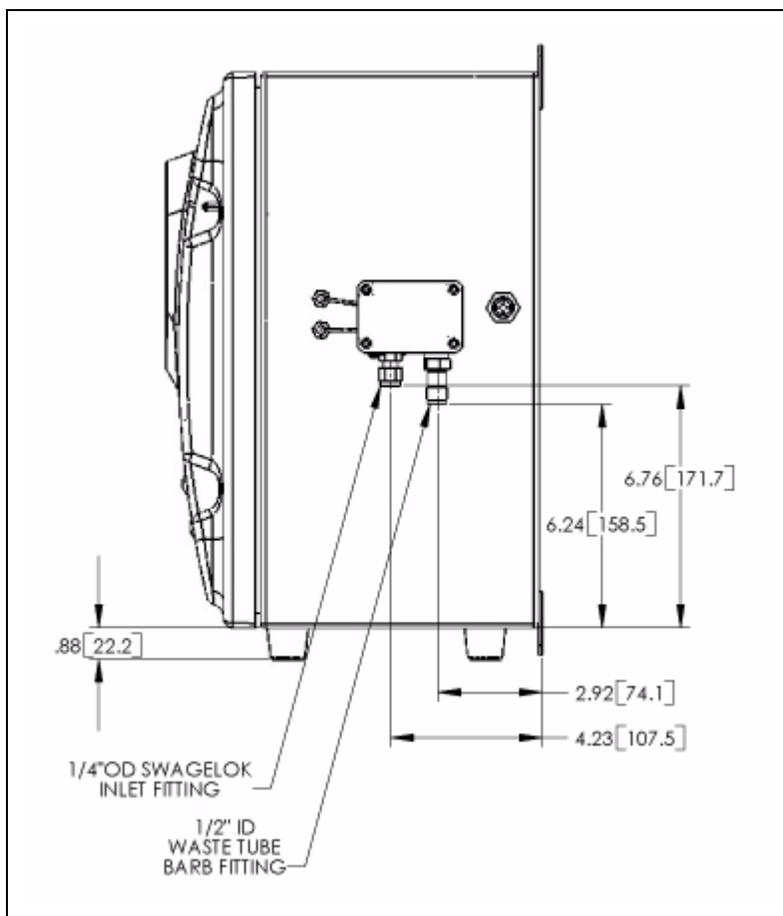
Right-Side Analyzer Dimensions, with Sample Inlet Block
